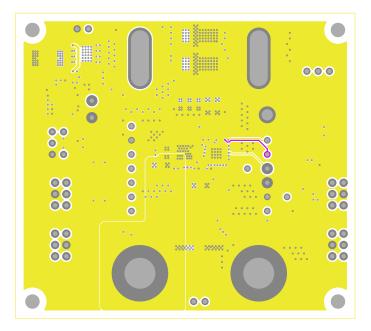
PCB - Inner Layer - Layer 4 (Top View)
